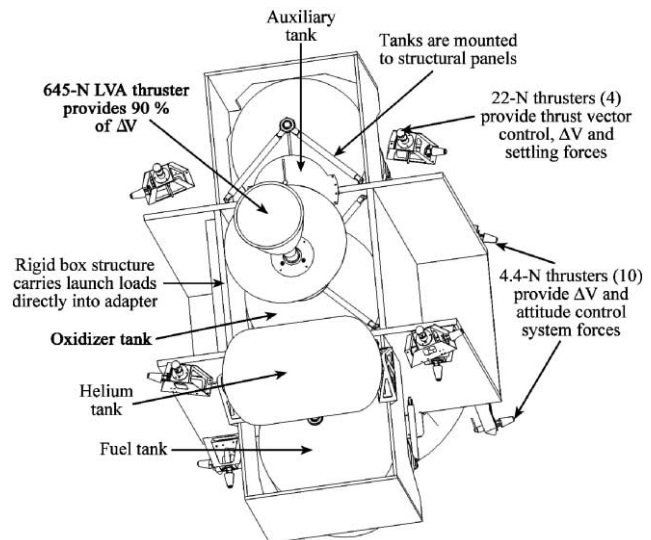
The spacecraft structure is shown with the top deck and the side radiator panels removed. The structure design is extremely efficient, constituting less than 7% of the launch mass. Spacecraft components are mounted to the outside surfaces of the top deck, the bottom deck, and the open box structures covering the fuel tanks.
